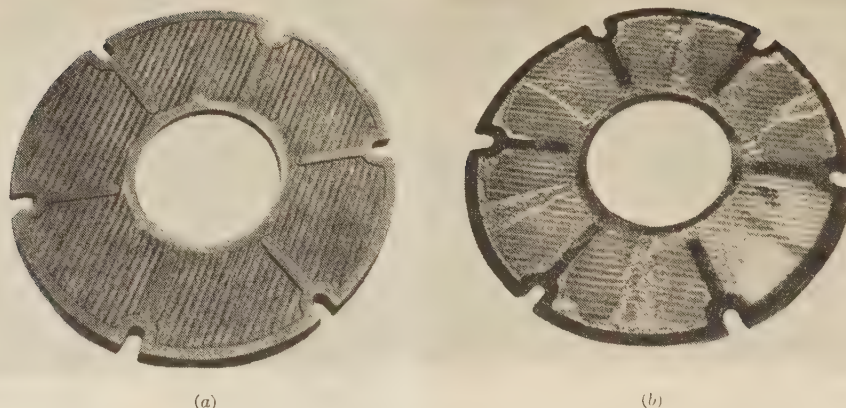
SAMPLE FILTER DISKS; FILTER ASSEMBLY CONSISTS OF MANY SUCH DISKS
